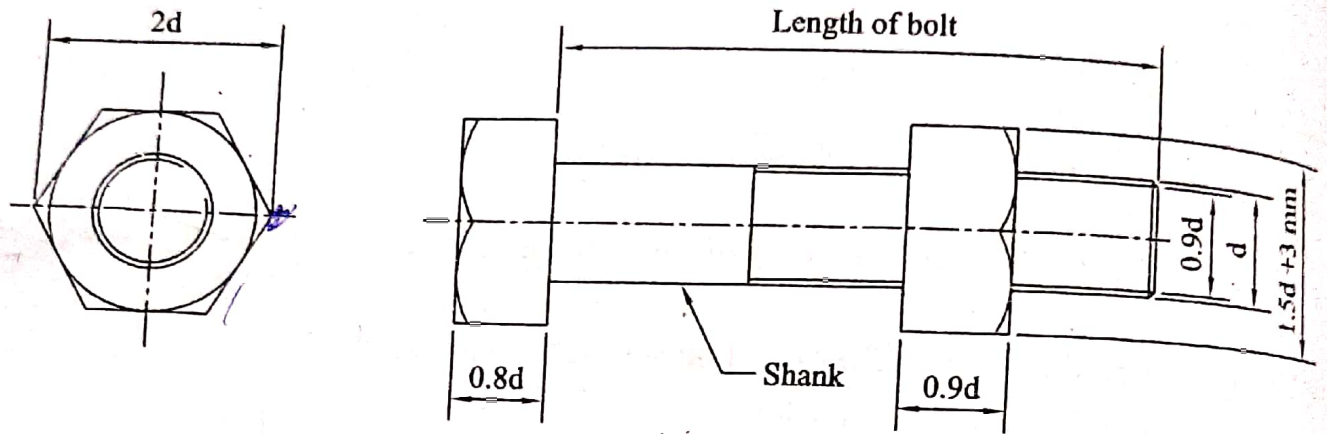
Front and side view of a hexagonal headed bolt across corners
